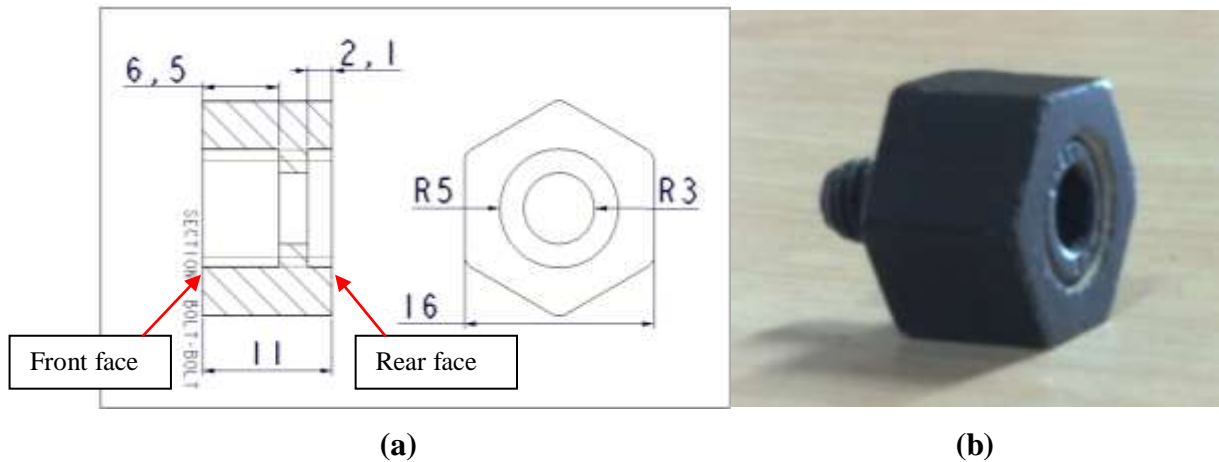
(a) Diagram showing 16 mm bolt head dimensions (mm). (b) Picture of bolt head with M6 cap screw.
